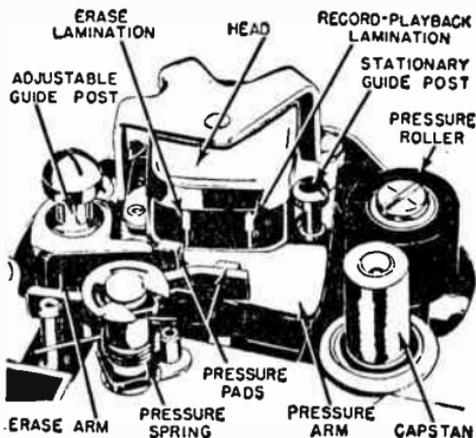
The head assembly and capstan of a typical tape recorder. Note that the head assembly includes the record-playback and erase head in one unit.
